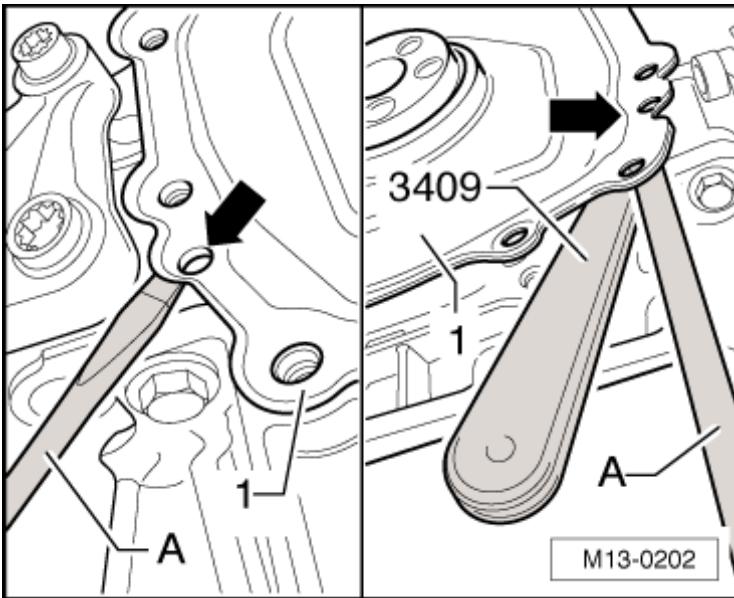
Identifying Screwdriver And Trim Removal Wedge 3409 To Press Off Sealing Flange
